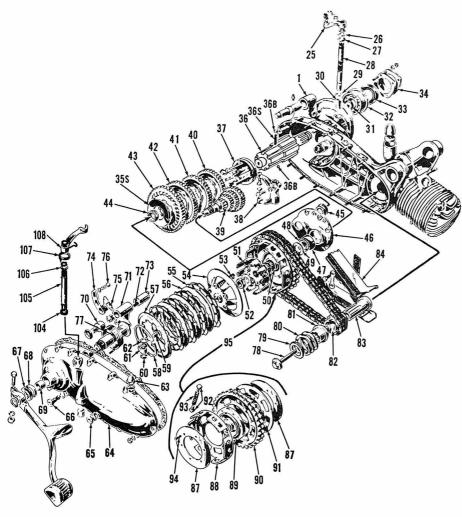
Exploded view of crankcase, clutch and gears. The clutch outer bell housing, sprocket and torque damper unit (95) is also shown exploded (parts 87 through 94). An early model is shown.
